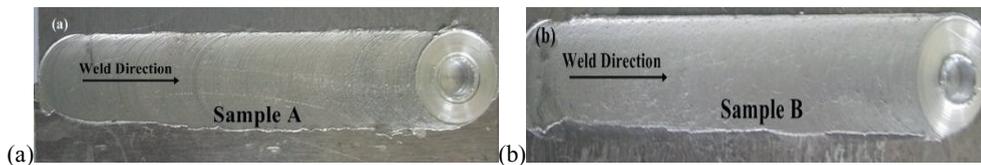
Snapshot of as - welded samples welded at (a) 710 rpm and 28mm/min (b) 710 rpm and 20 mm/min.
